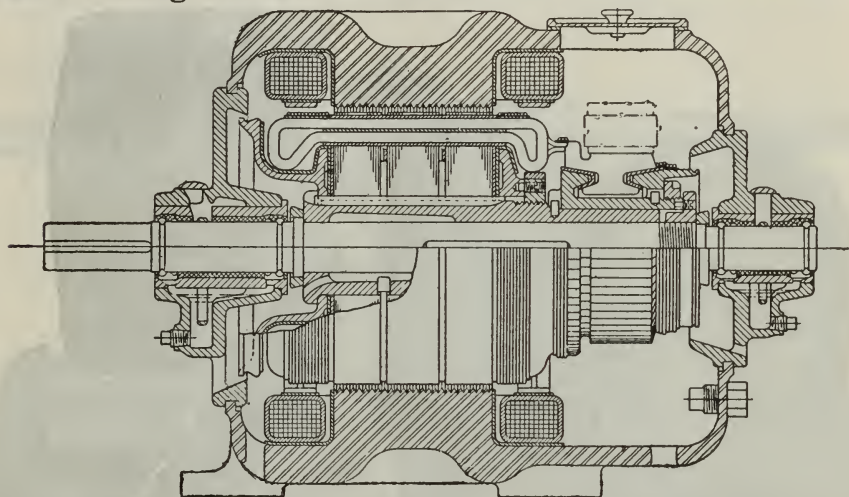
,225.—Sectional view of Shaw type Z Crane motor. The frames are of cast steel split diagonally and when assembled with bearings completely enclose the armature. The motor has four salient poles cast integral with the frame and so shaped that the field coils can easily be put in place. The brake is attached to the lower half of the frame so that the motor can be taken apart without disturbing it except that the band must be removed by taking out the two pins holding same.
